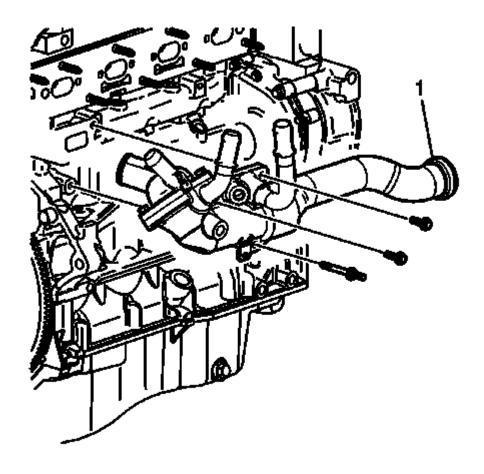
Thermostat Housing And Water Feed Pipe Courtesy of GENERAL MOTORS COMPANY
